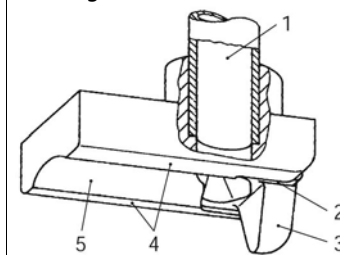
Varieties of hot gas extrusion welding
